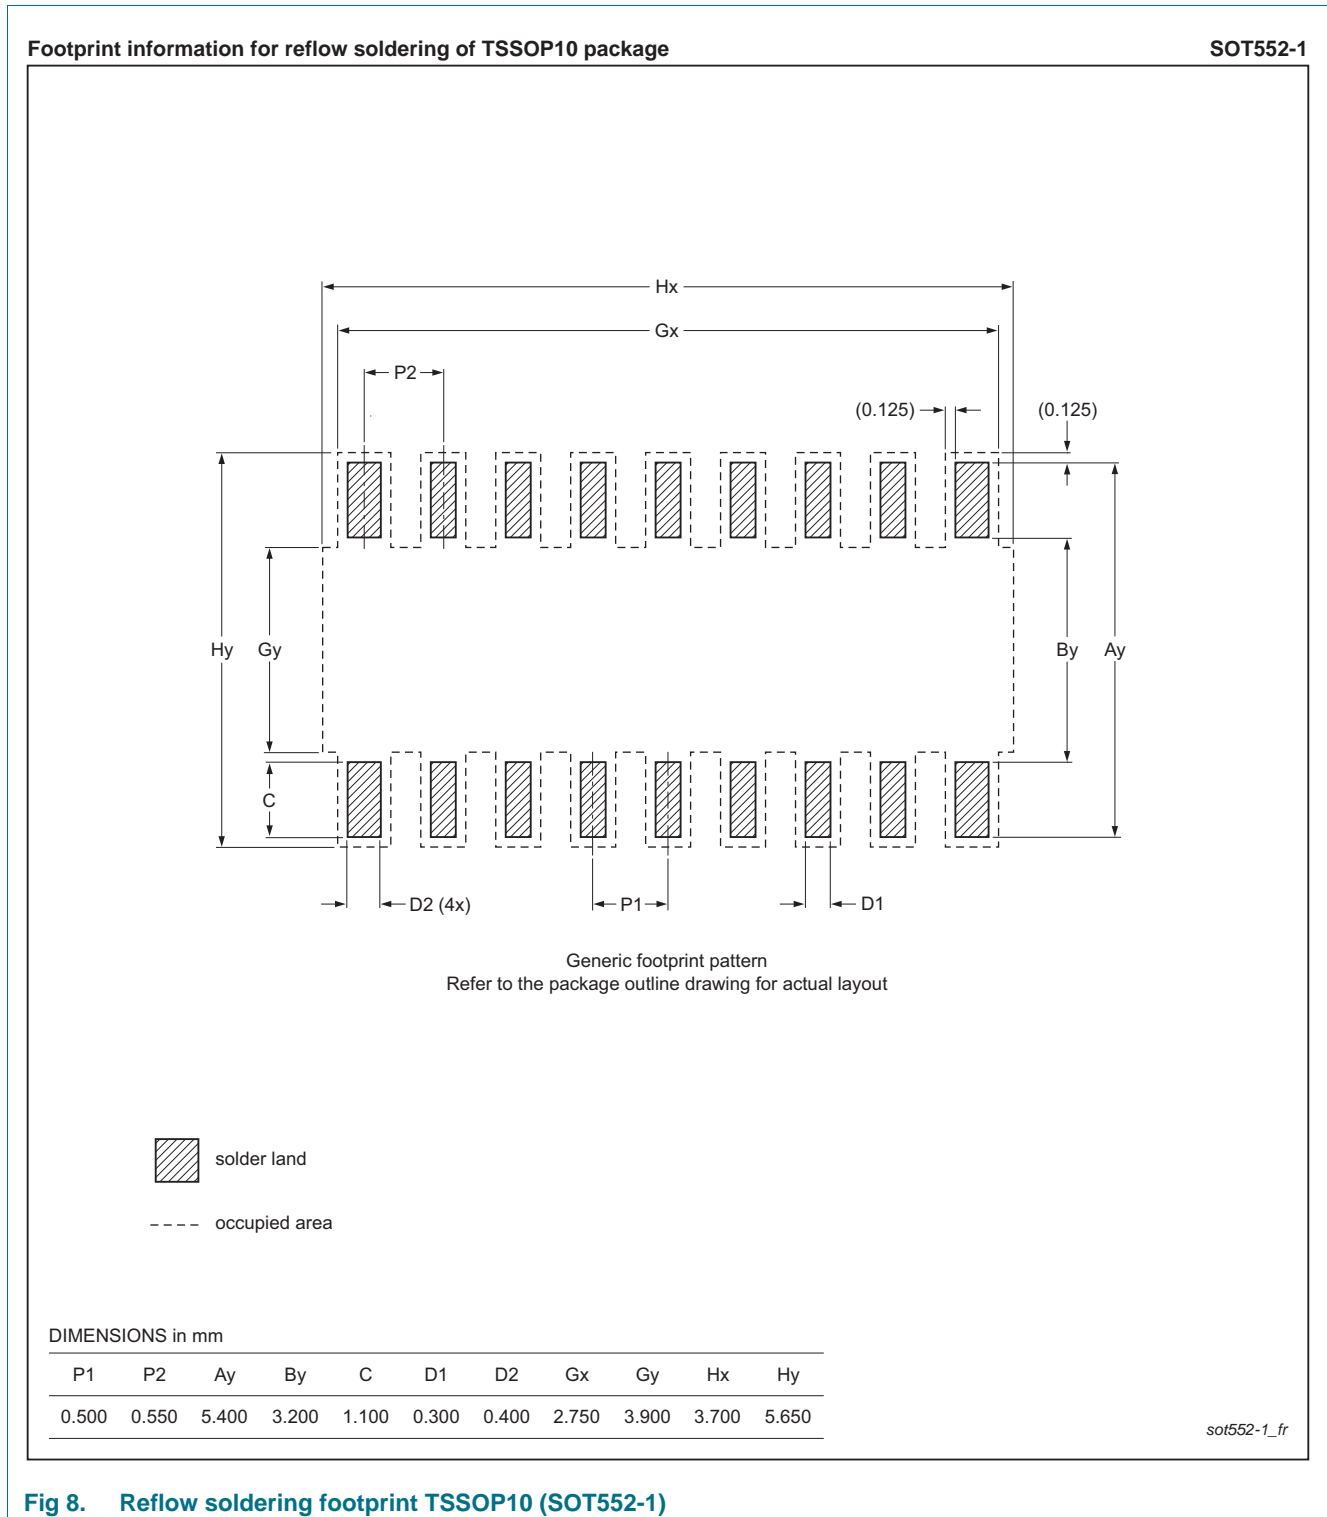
Reflow soldering footprint TSSOP10 (SOT552-1)
